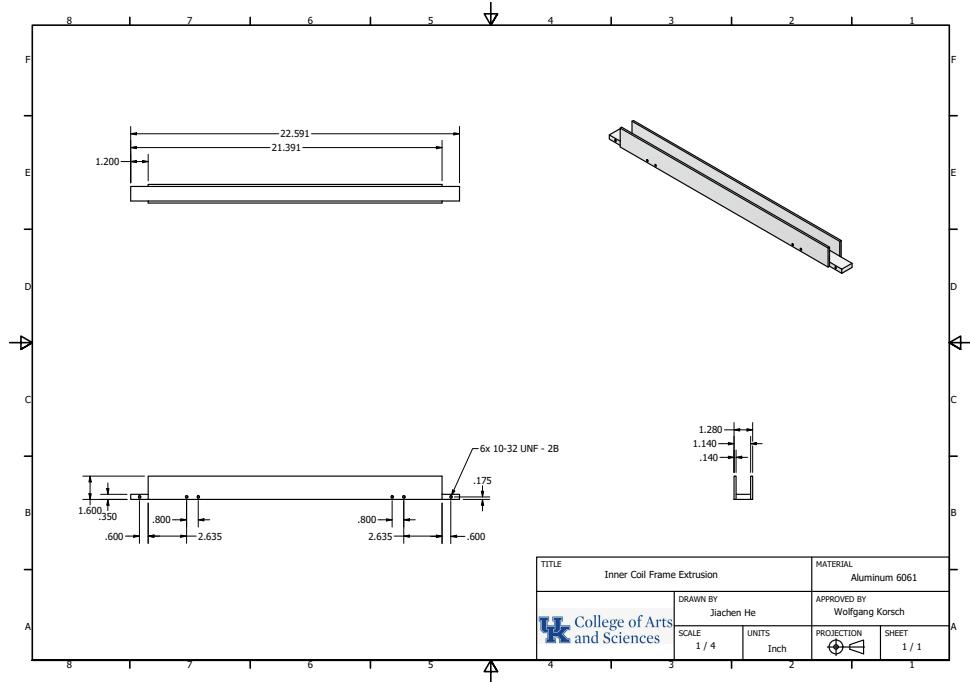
Inner Coil Frame Extrusion (Material: Aluminum 6061)
